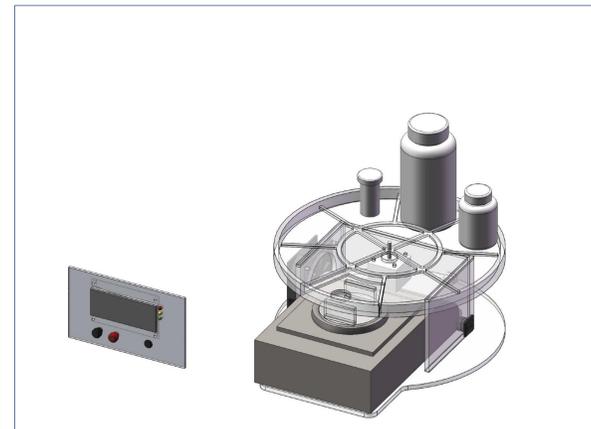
SolidWorks® Assembly Model of Prototype Device (Trimetric View)
